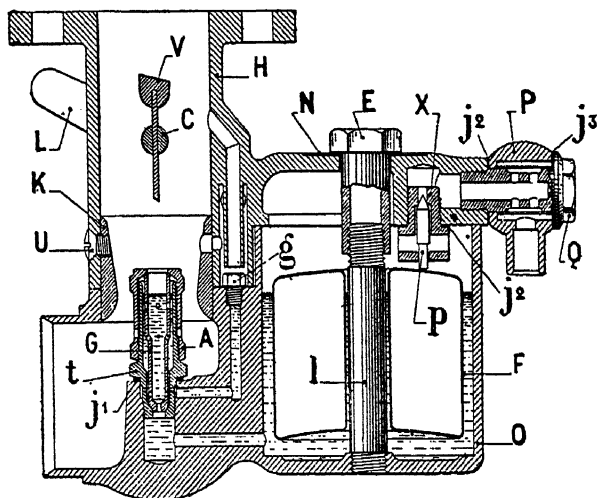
Sections of the Solex Carburettor, Type MOV.T.
